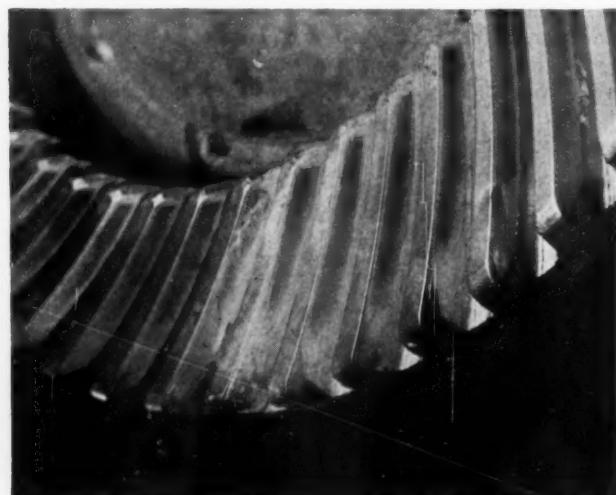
TOOTH BEARING OF THE GEAR SHOWN IN FIG. 3
